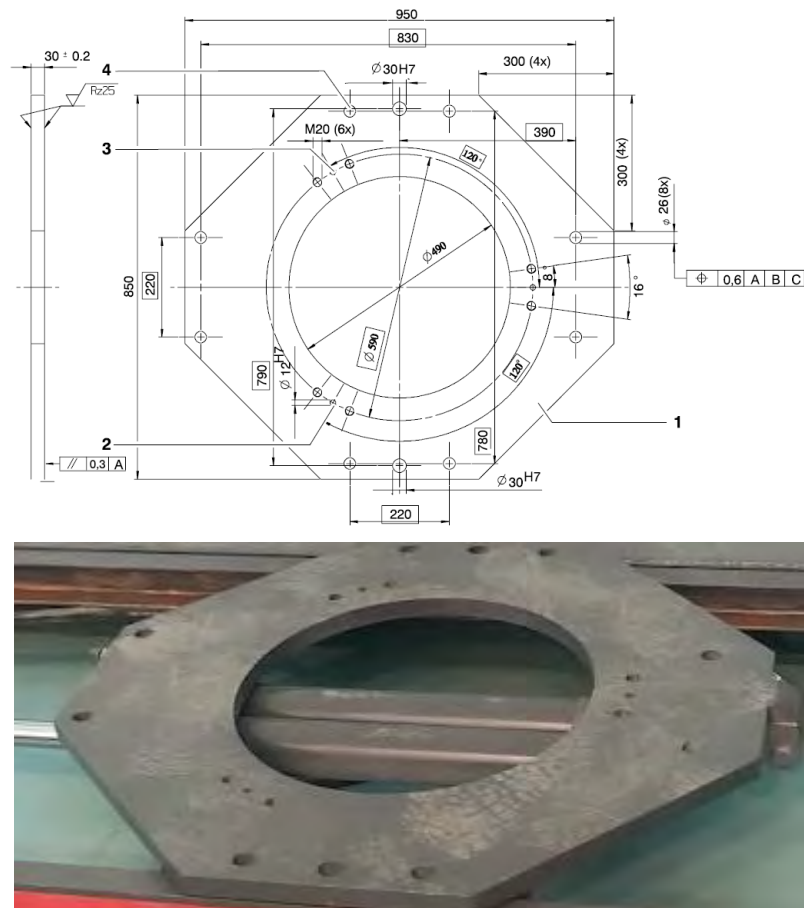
Clamping adapter plate for KUKA KR60 robot.
